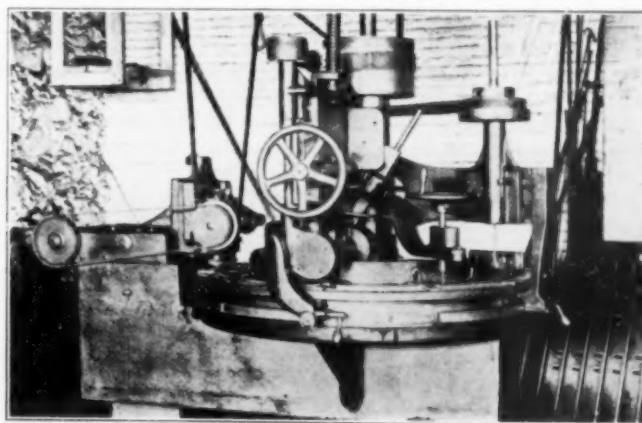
ARCH MILLING, DRILLING AND TAPPING
